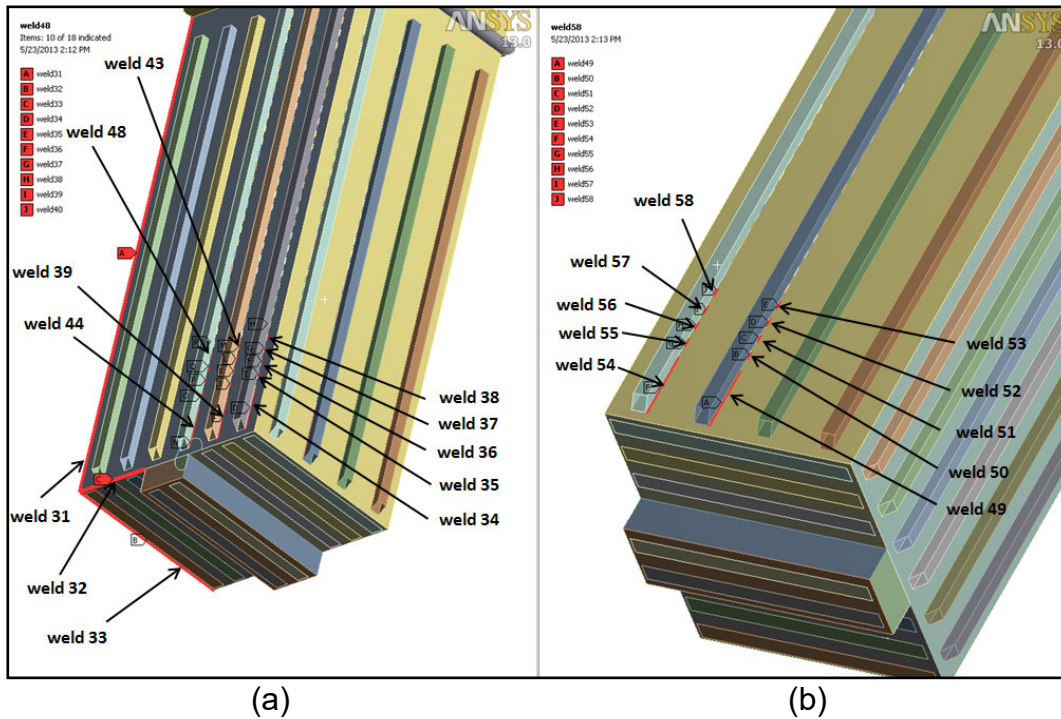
Weld locations for the modified outer tank
